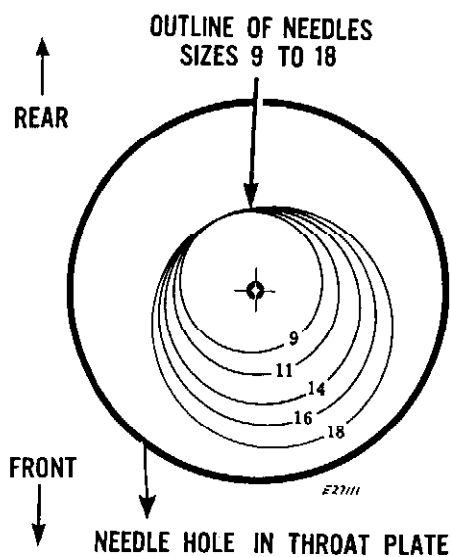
Needle Hole in Straight-Stitching Throat Plate
